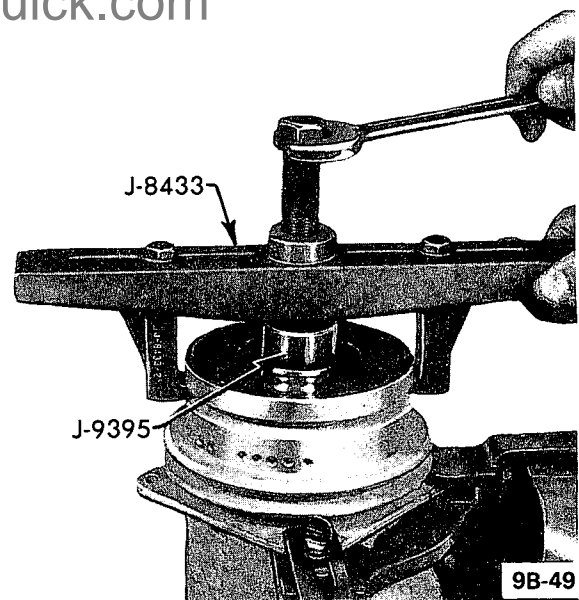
B-73 Removing Pulley Assembly - 6 Cylinder Compressor
